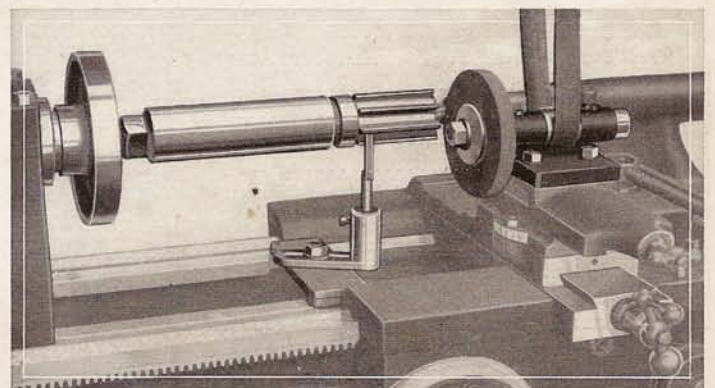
Sharpening an Adjustable Blade Reamer on a No. 22—9-Inch Junior Lathe Equipped with Countershaft Drive Grinding Attachment
